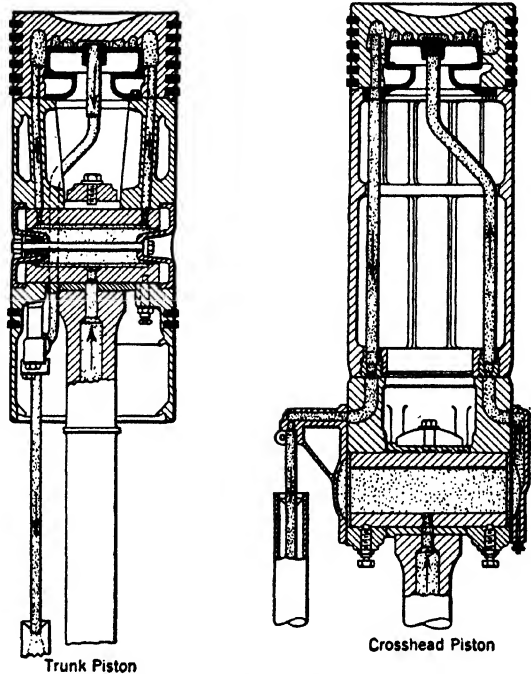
Piston cooling arrangement for trunk and crosshead design.
